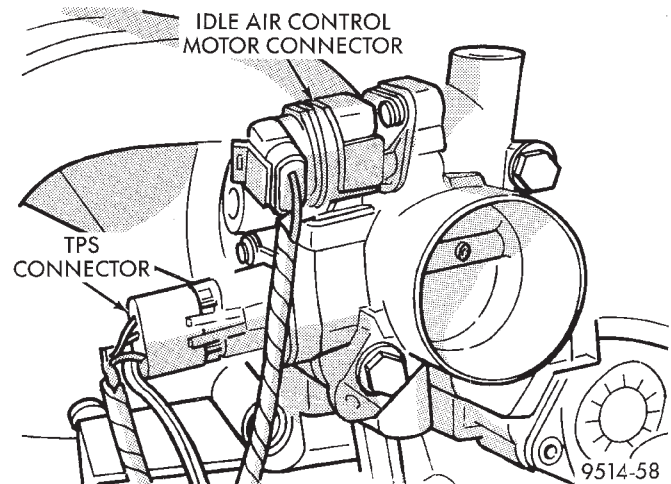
Throttle Body Electrical and Vacuum Connections—2.4L
